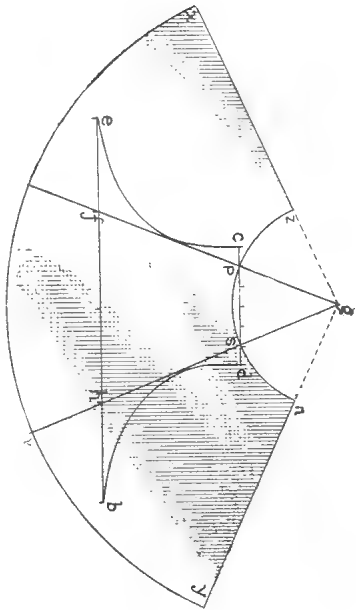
Method of Obtaining Pattern for Expansion Joint.
